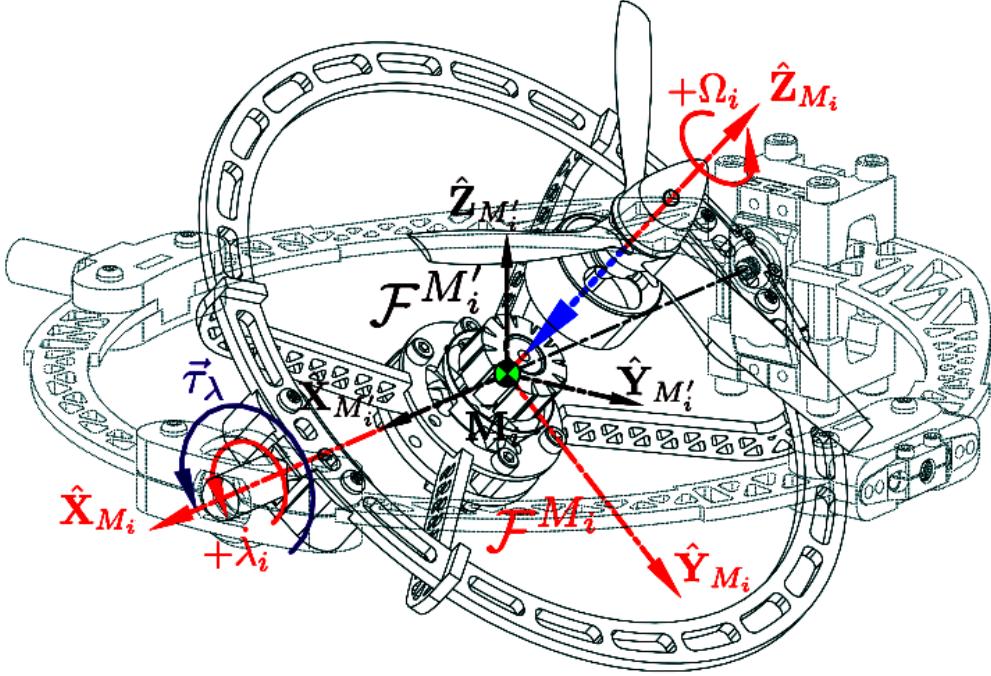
Exploded inner ring inertial bodies for $\vec{\tau}_\lambda(\lambda_i)$
